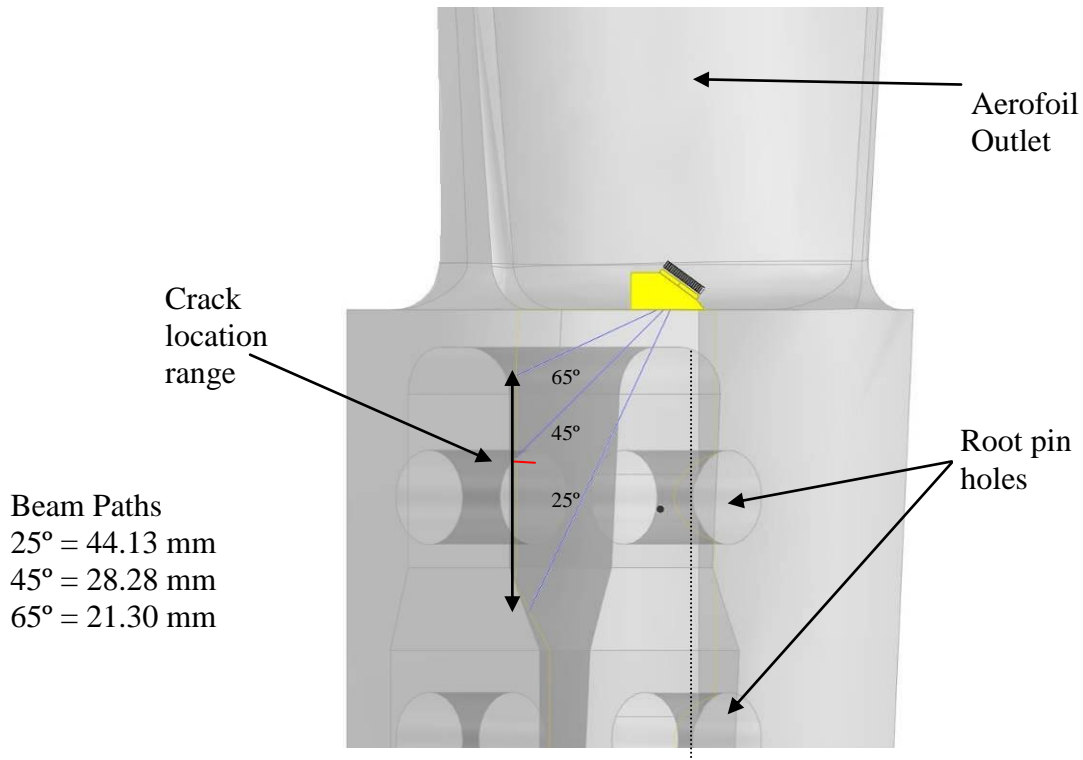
IP Rotor Pinned Blade Root Shear Wave Inspection
